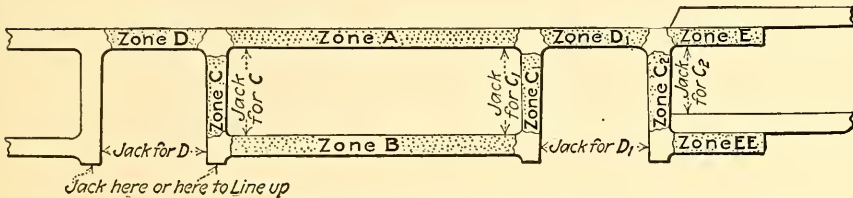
Method of Preventing Unequal Stresses When Welding Locomotive Frames Broken at Various Points.
